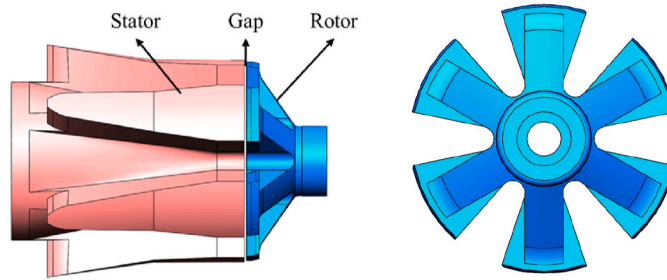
Structure of the stator and rotor (left is the side view of the stator and rotor; right is the top view of the rotor).
